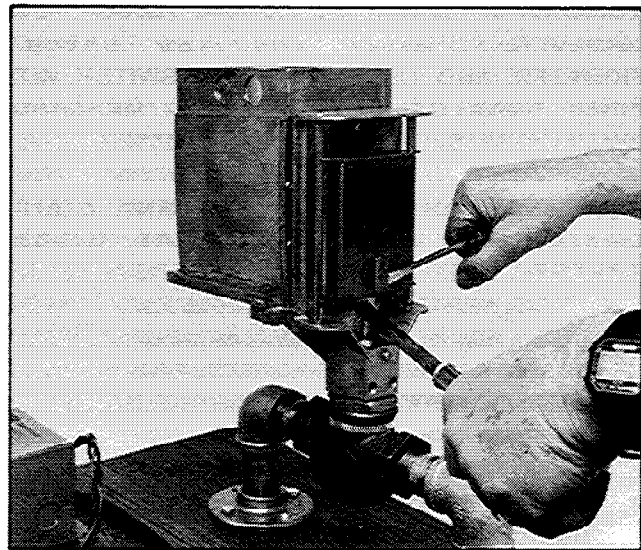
Removal of Stem Button Clamp from Q618A Valve Linkage.
